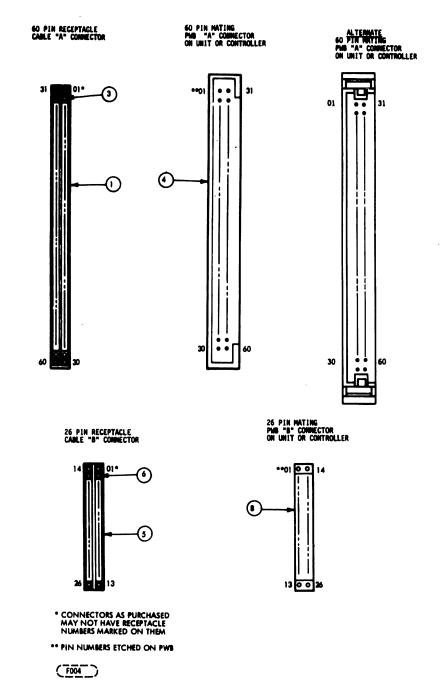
I/O CONNECTORS - CABLE MOUNT AND PWB MOUNT
